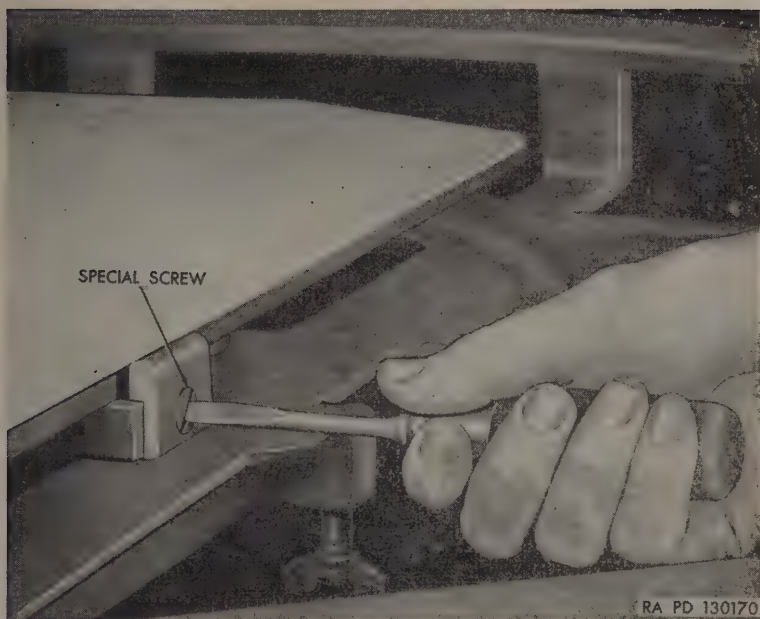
Loosening carriage clamping plate assembly—sound-ranging plotting board M1 or M1A1.
